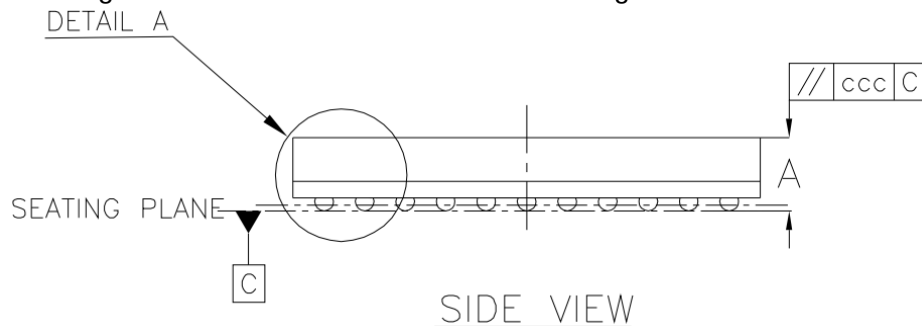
RKNanoD-G LFBGA121 Package SIDE View
